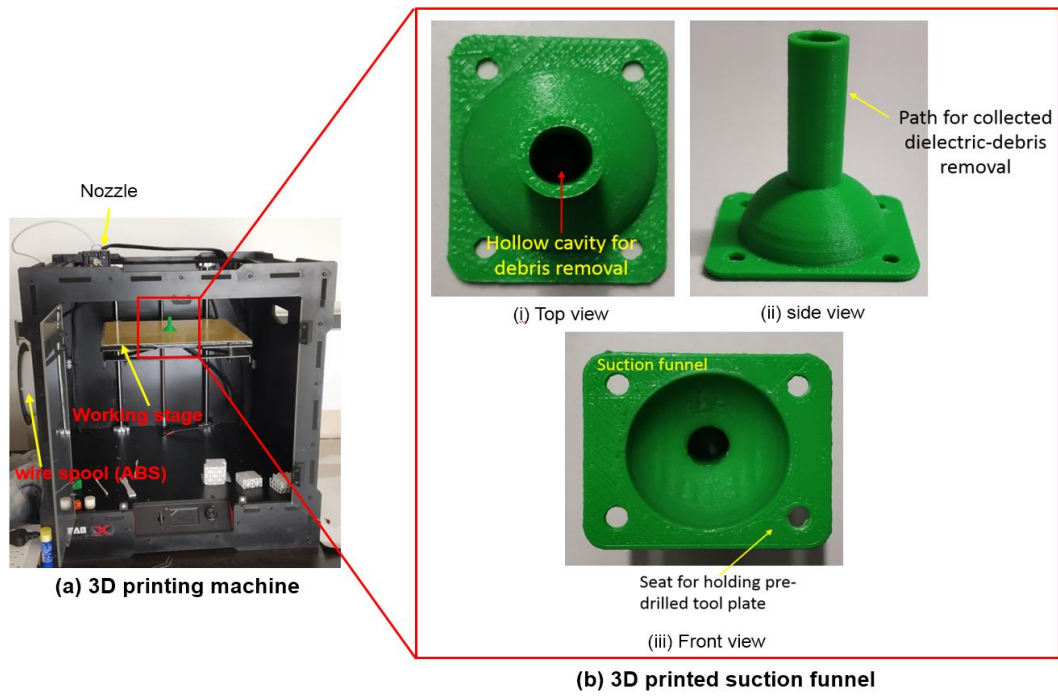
Fabricated suction cup/funnel using (a) 3D printing machine, and (b) different views of fabricated suction funnel.
